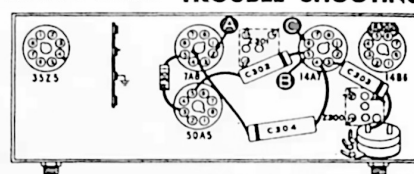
BOTTOM VIEW, SHOWING SECTION 3 TEST POINTS
